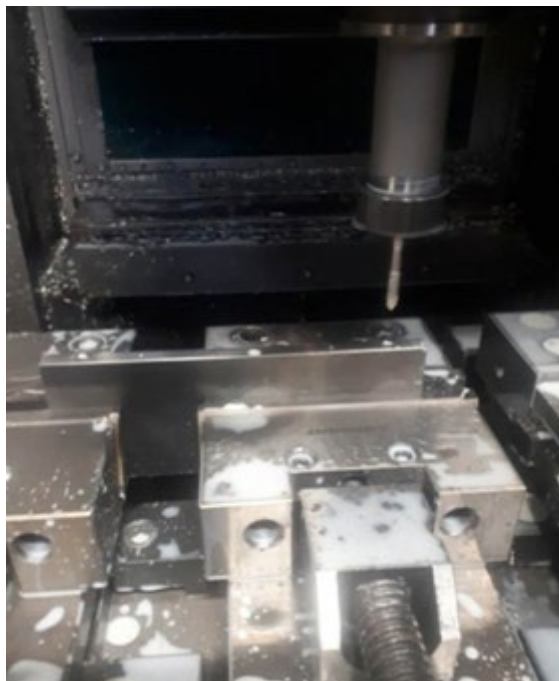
Making four M5 threads in the base of the back plate securing the shaft
